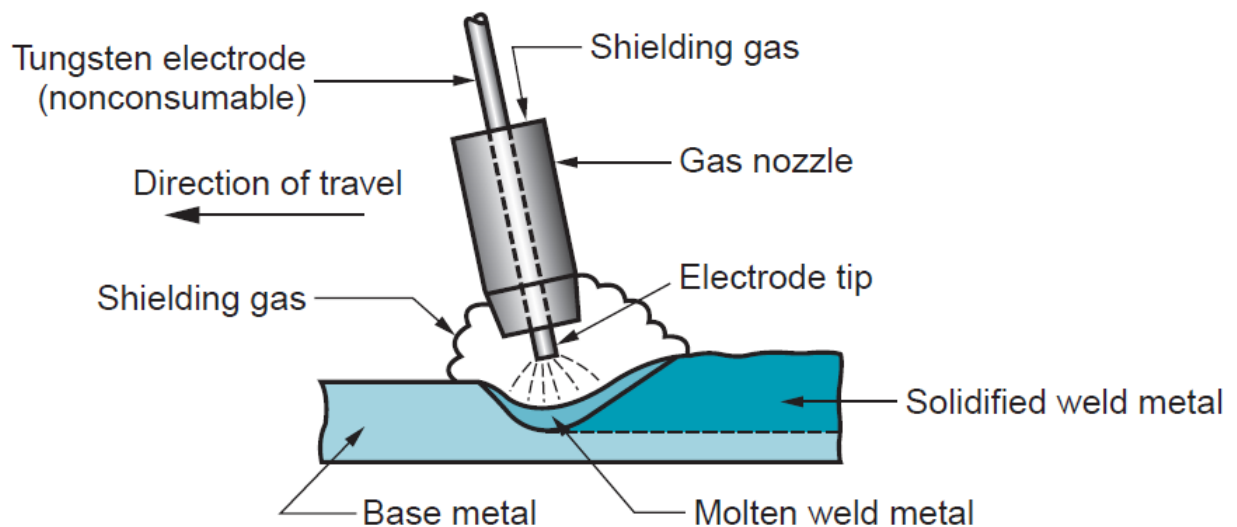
Gas tungsten arc welding (GTAW).
